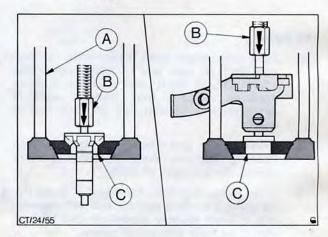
Pressing impeller from bearing shaft assembly and pump pulley hub onto front end of shaft
